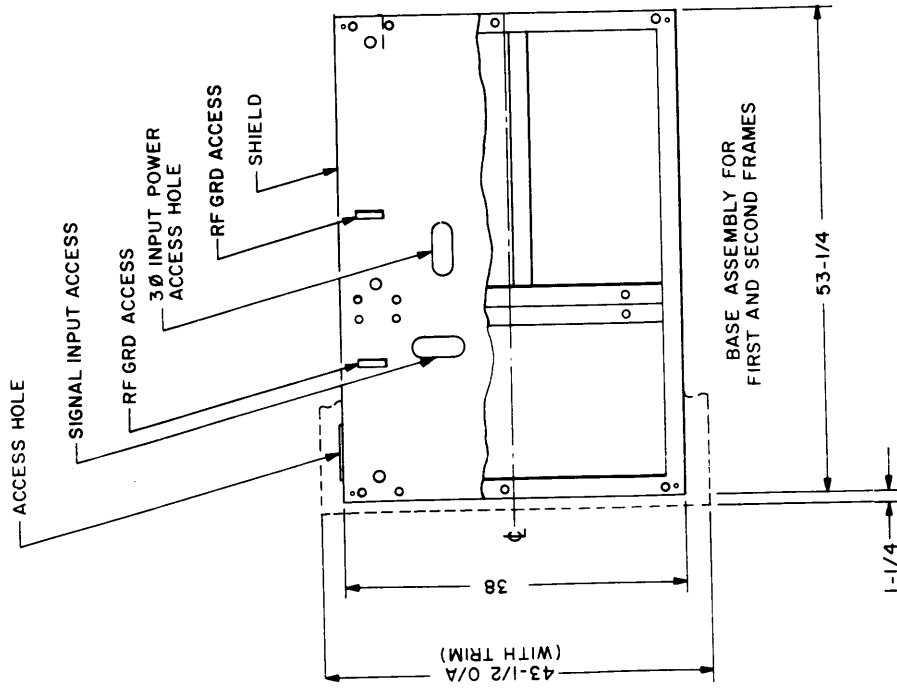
Dimensional Clearance Requirements, Installation Diagram (Sheet 2 of 2)
